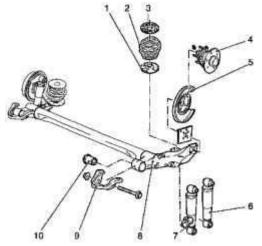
Components of the rear axle: 1 - the bottom cushion ring, 2 - Rear spring, 3 - upper shockabsorbing ring, 4 - wheel bearing module with a sensor mounted on the wheels of the vehicle (arrow), 5 - cap 6 - shock absorbers, 7 - shock absorber system CDC; 8 - rear axle; 9 - arm rear axle, 10 - damping bush
